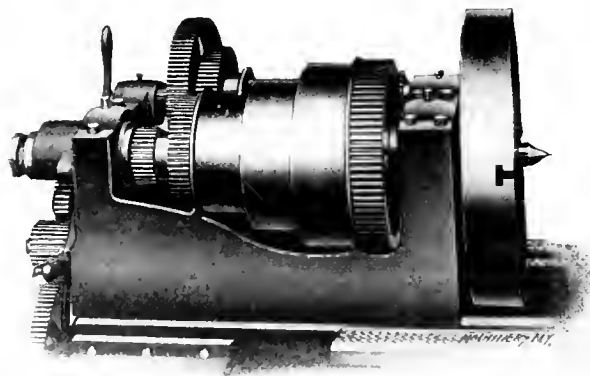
Head-stock, with Guard Removed, showing Gearing.
